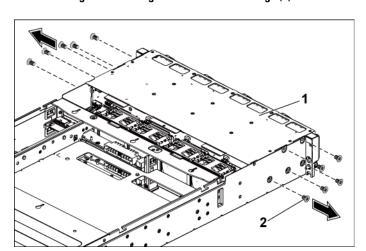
Removing and Installing the 3.5" Hard-Drive Cage (1)
